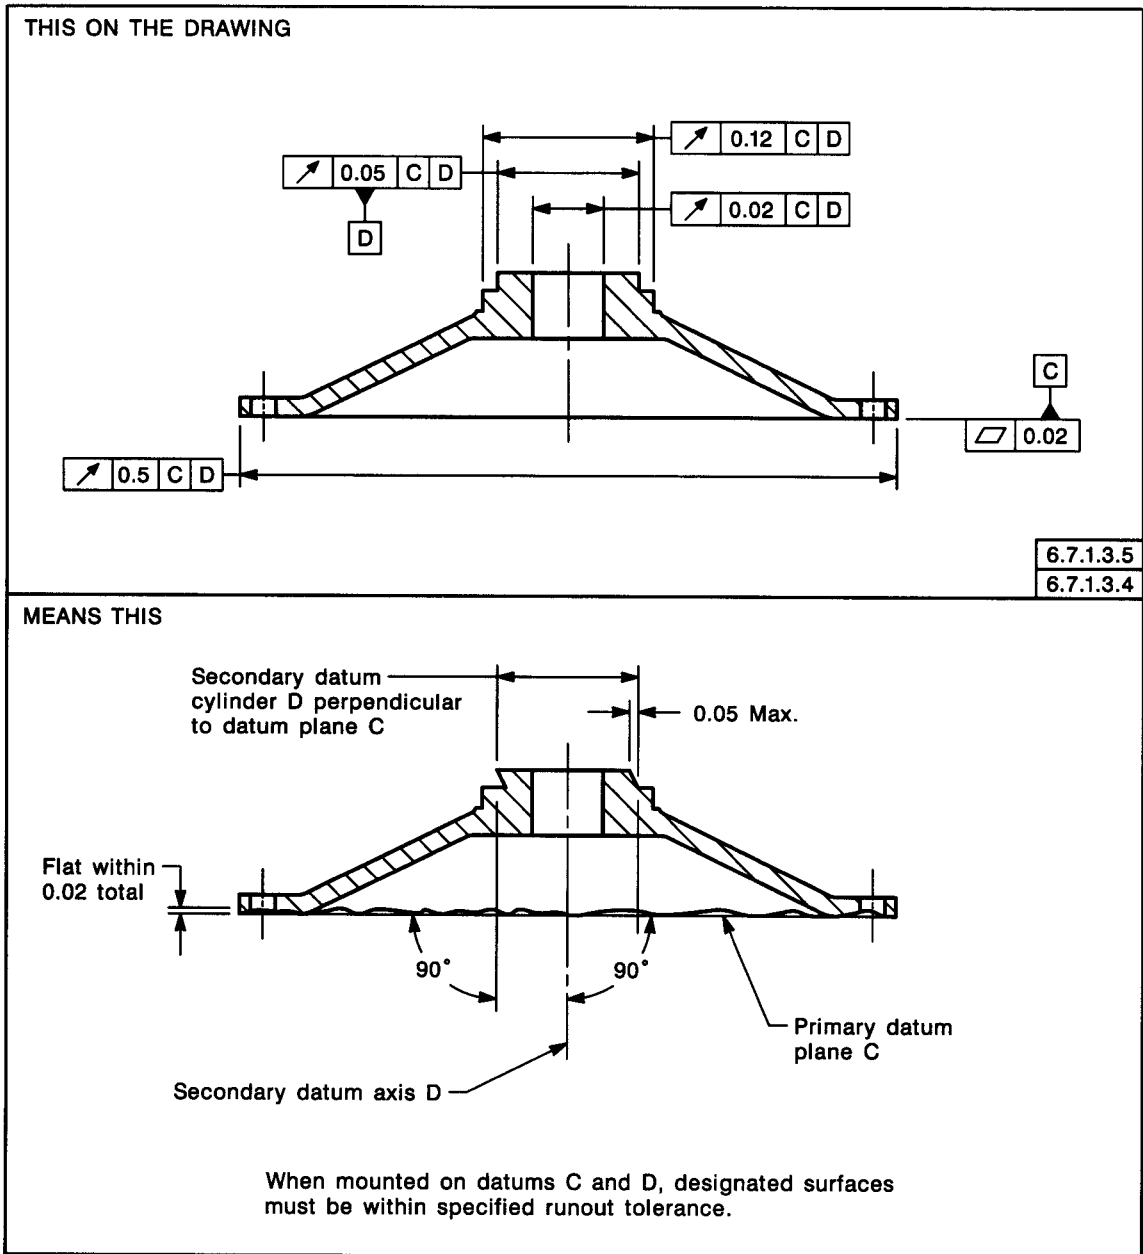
SPECIFYING RUNOUT RELATIVE TO A DATUM SURFACE AND DIAMETER WITH FORM CONTROL SPECIFIED
